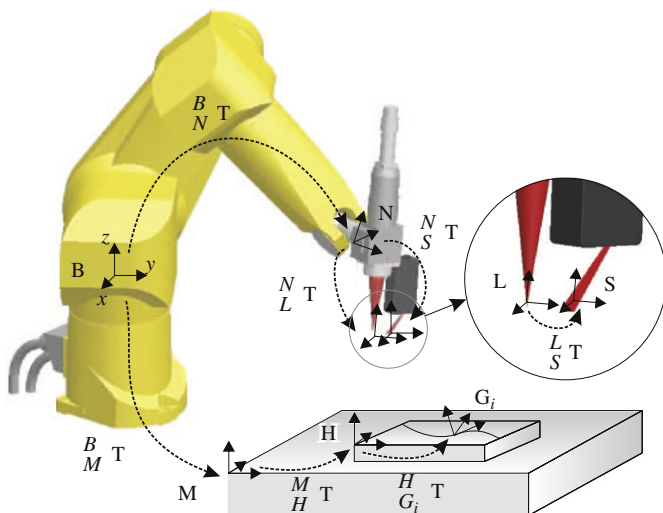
Frames and transformations for sensor-guided robotic laser welding.
